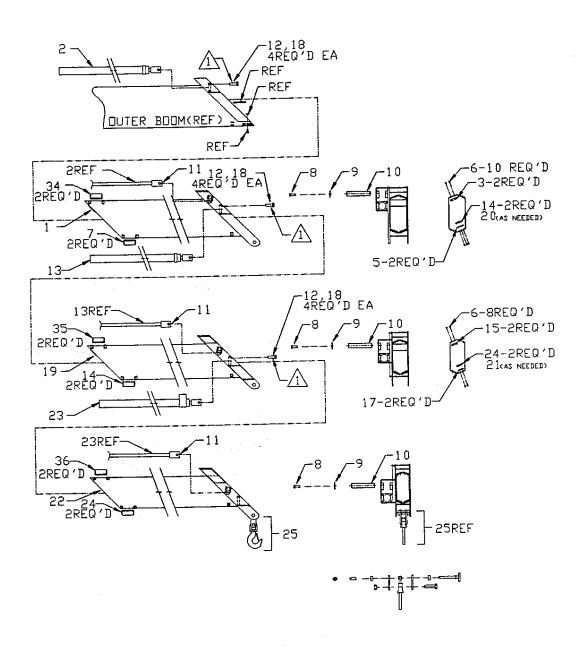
A. EXTENSION BOOM ASSEMBLY - 3H (41710036)
